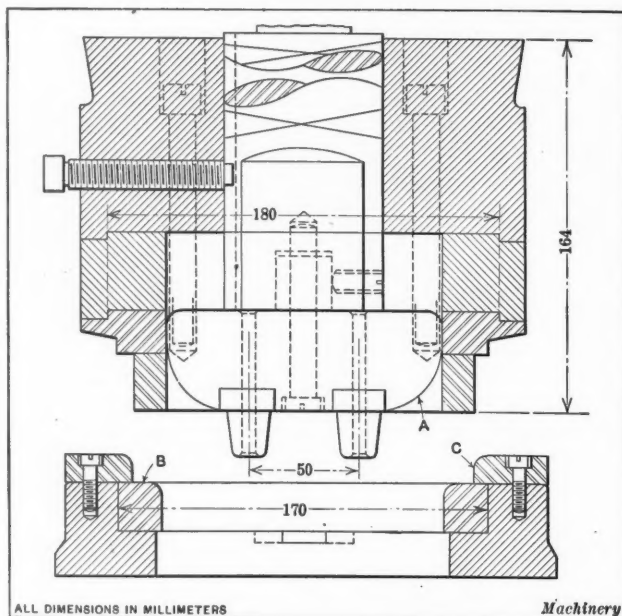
Tools used for Second Drawing Operation on the Upper Part of the Legs
